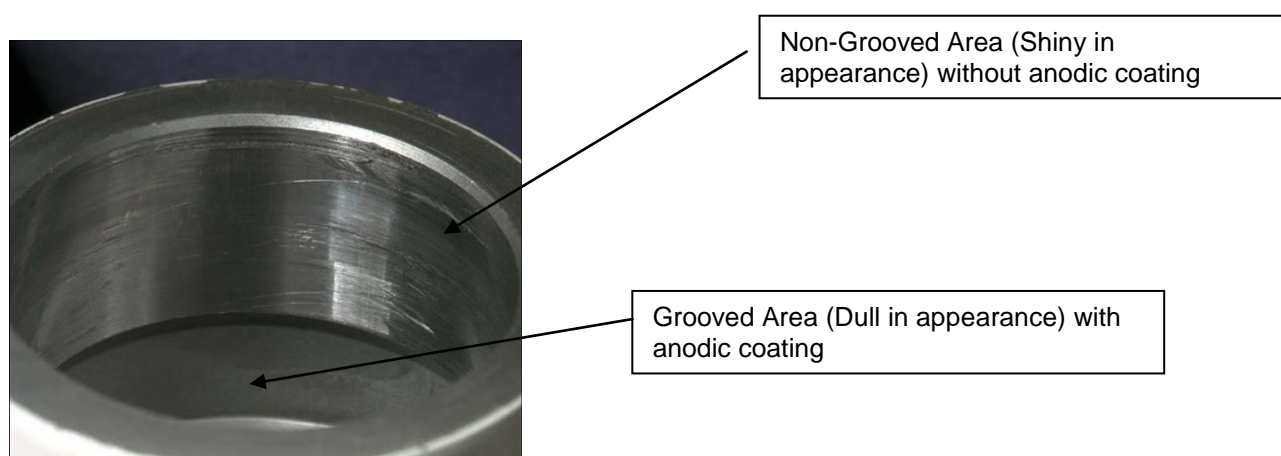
ANODIC COATING MISSING FROM NON-GROOVED SURFACE OF HOUSING INSIDE DIAMETER
